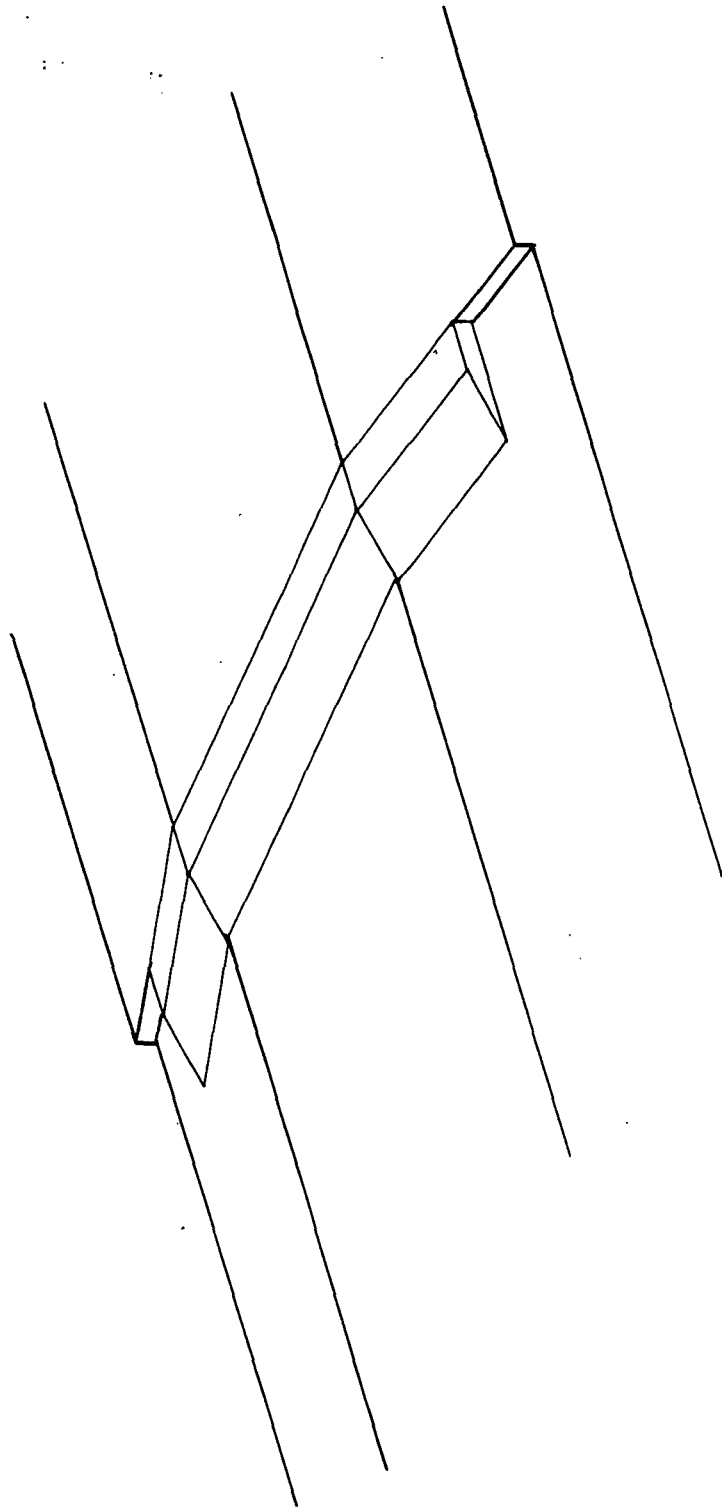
Shingle Lay-up Tool Surface Showing 12° Wedge
